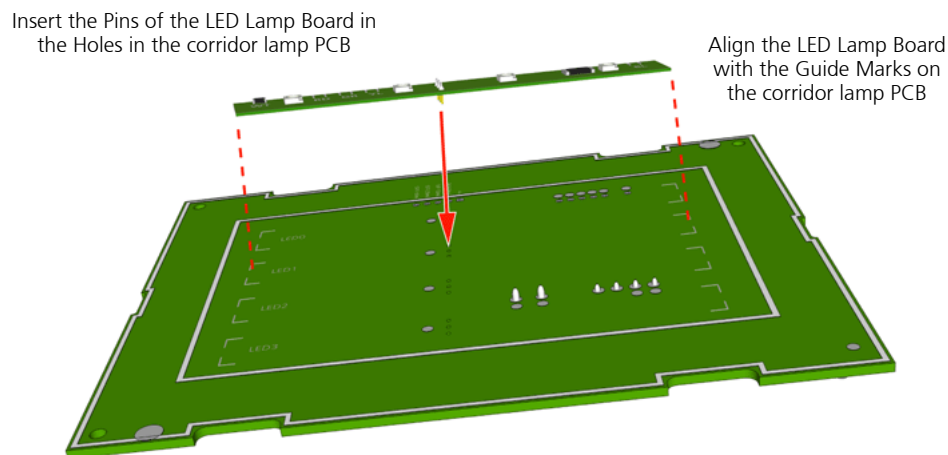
Plugging LED lamp board into the corridor lamp PCB
